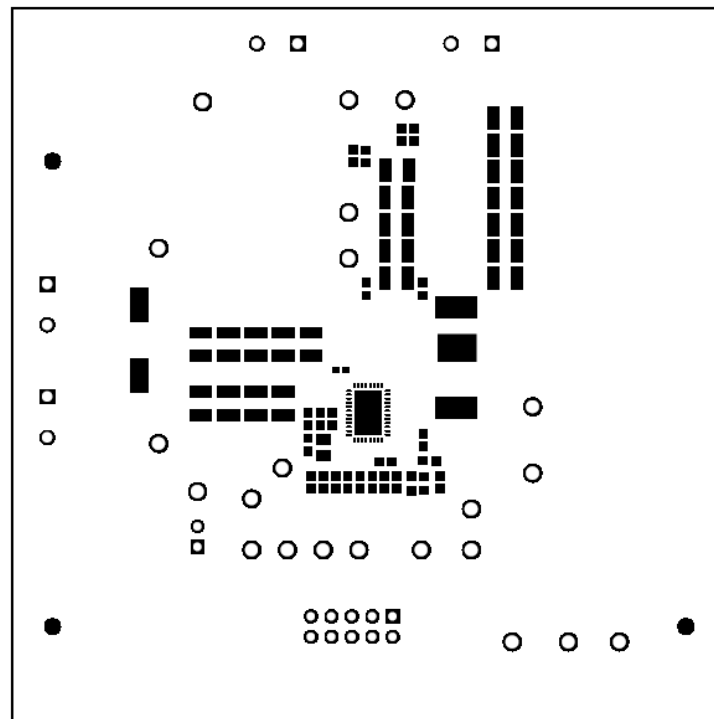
PWR-784EVM Top Solder Mask (Top View)
